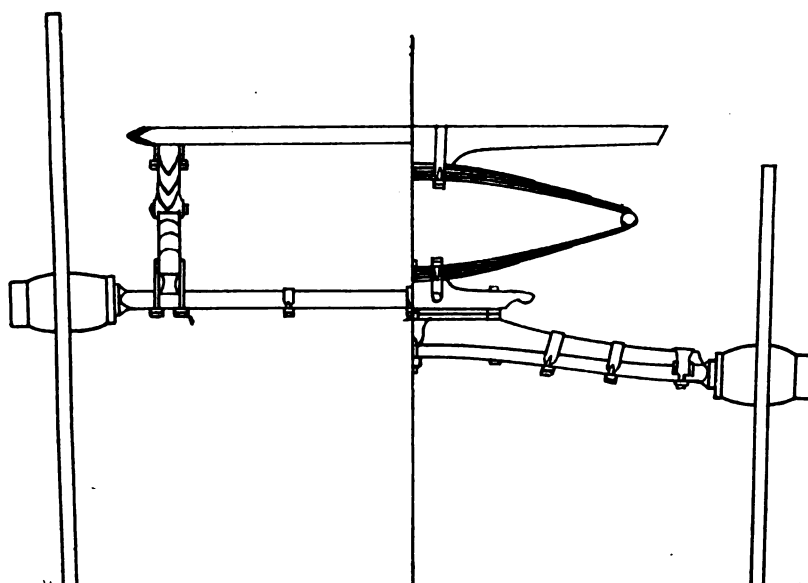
HALF REAR END VIEW OF WAGON GEAR
